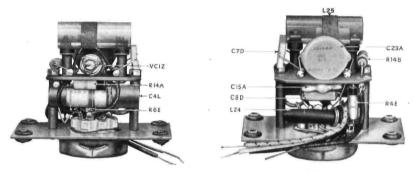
BOTTOM VIEW OF I.F. CHASSIS (Completely Assembled)
